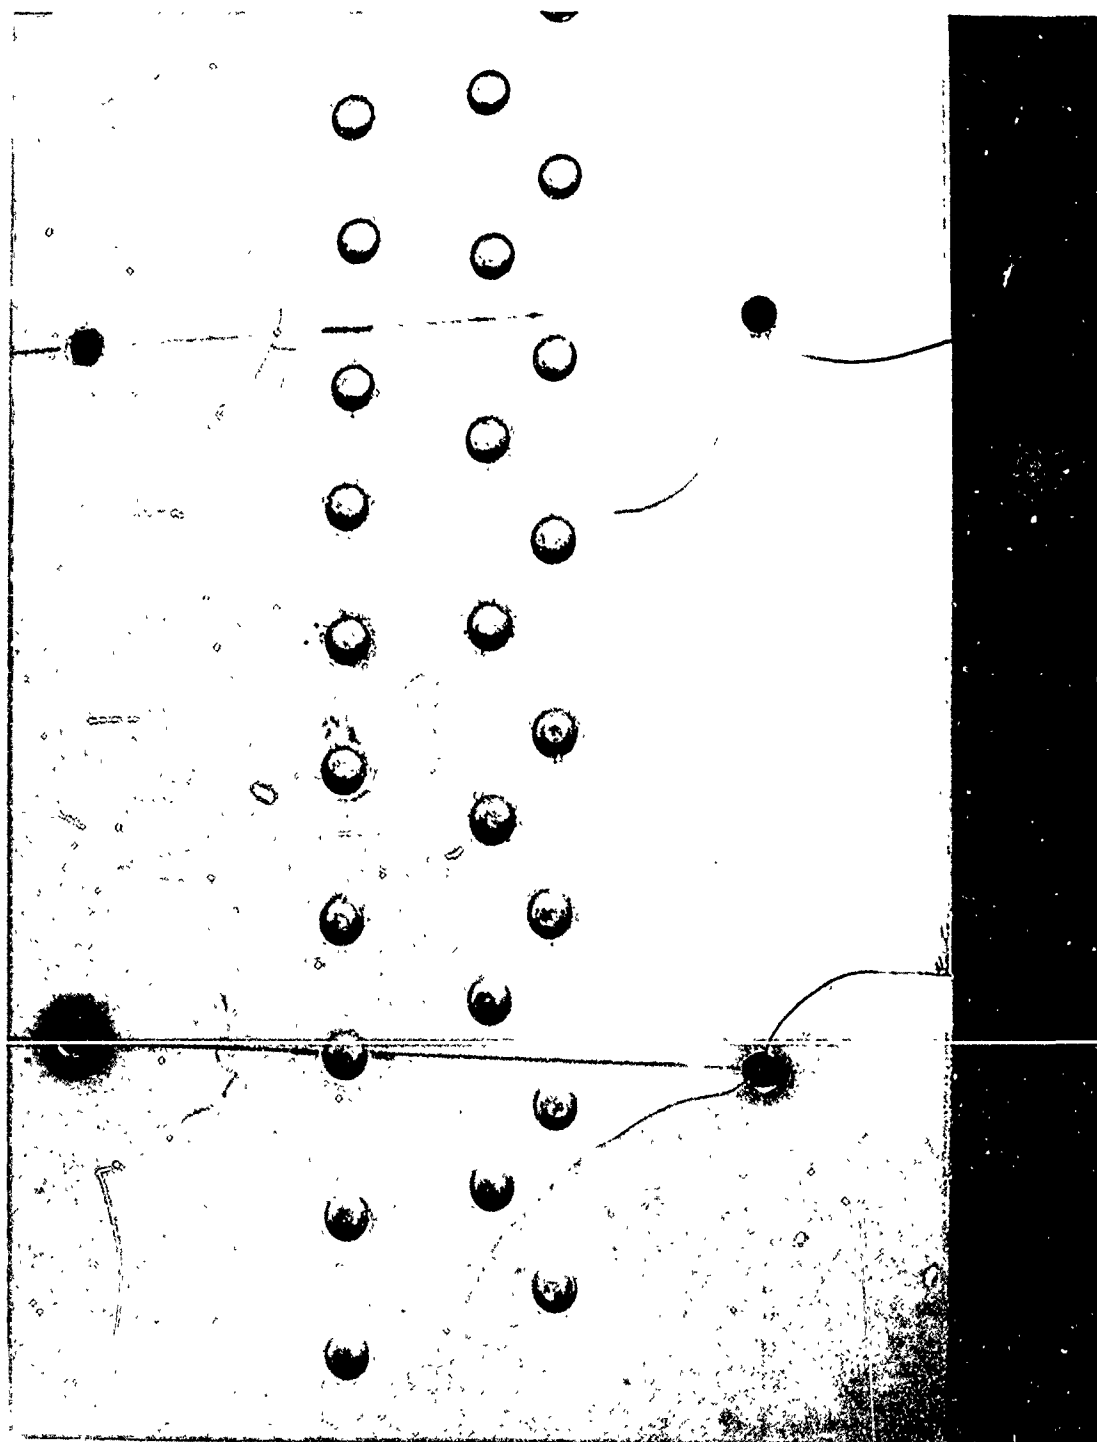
FUSELAGE CANTED BULKHEAD; Spot Welded Assembly.
